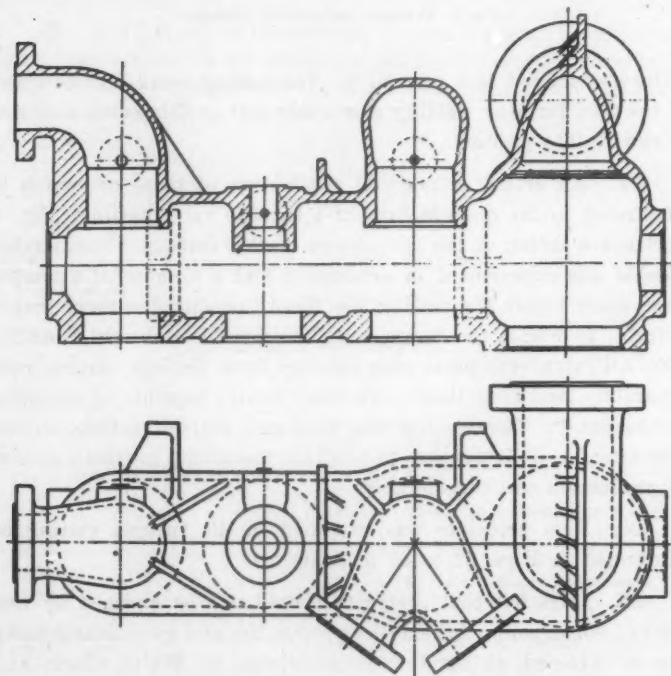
THROTTLE VALVE CASTING (ORIGINAL DESIGN).
